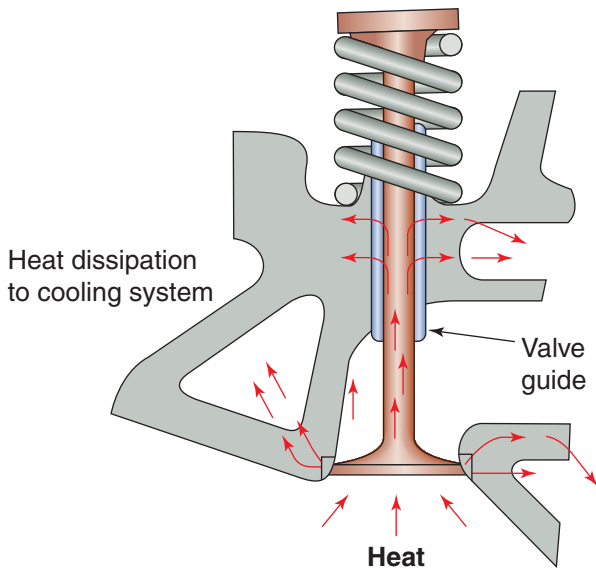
The valve guide helps to dissipate heat from the valve.
